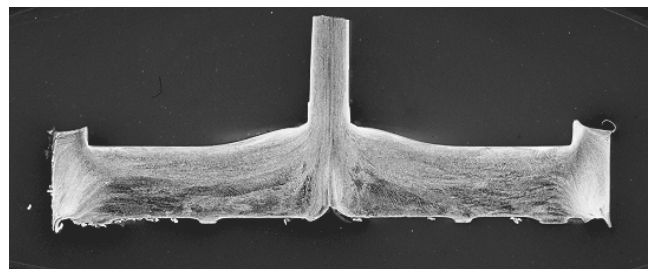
Cross-section of an extrusion butt of the AgMm1 alloy
